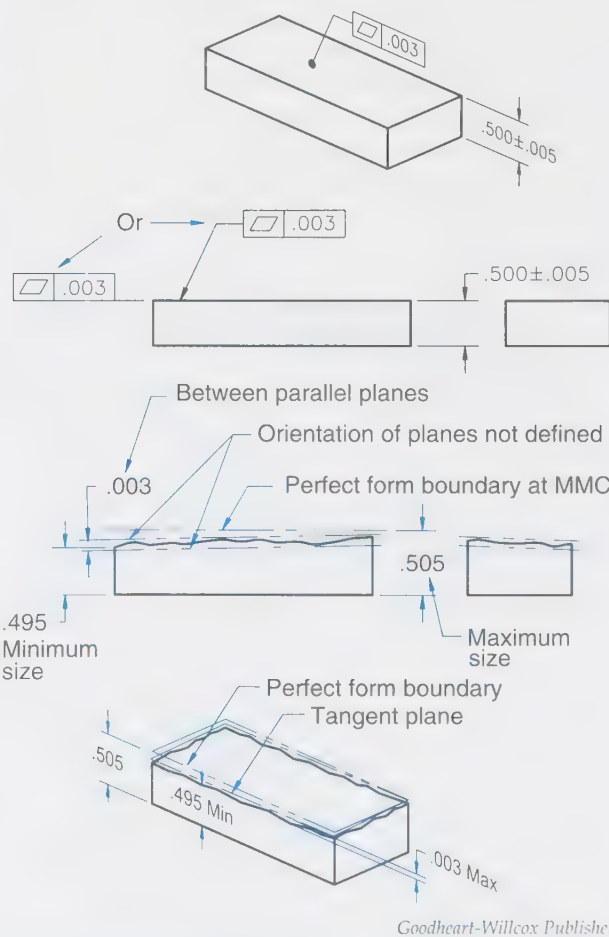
Flatness tolerances create a tolerance zone bounded by two parallel planes.
